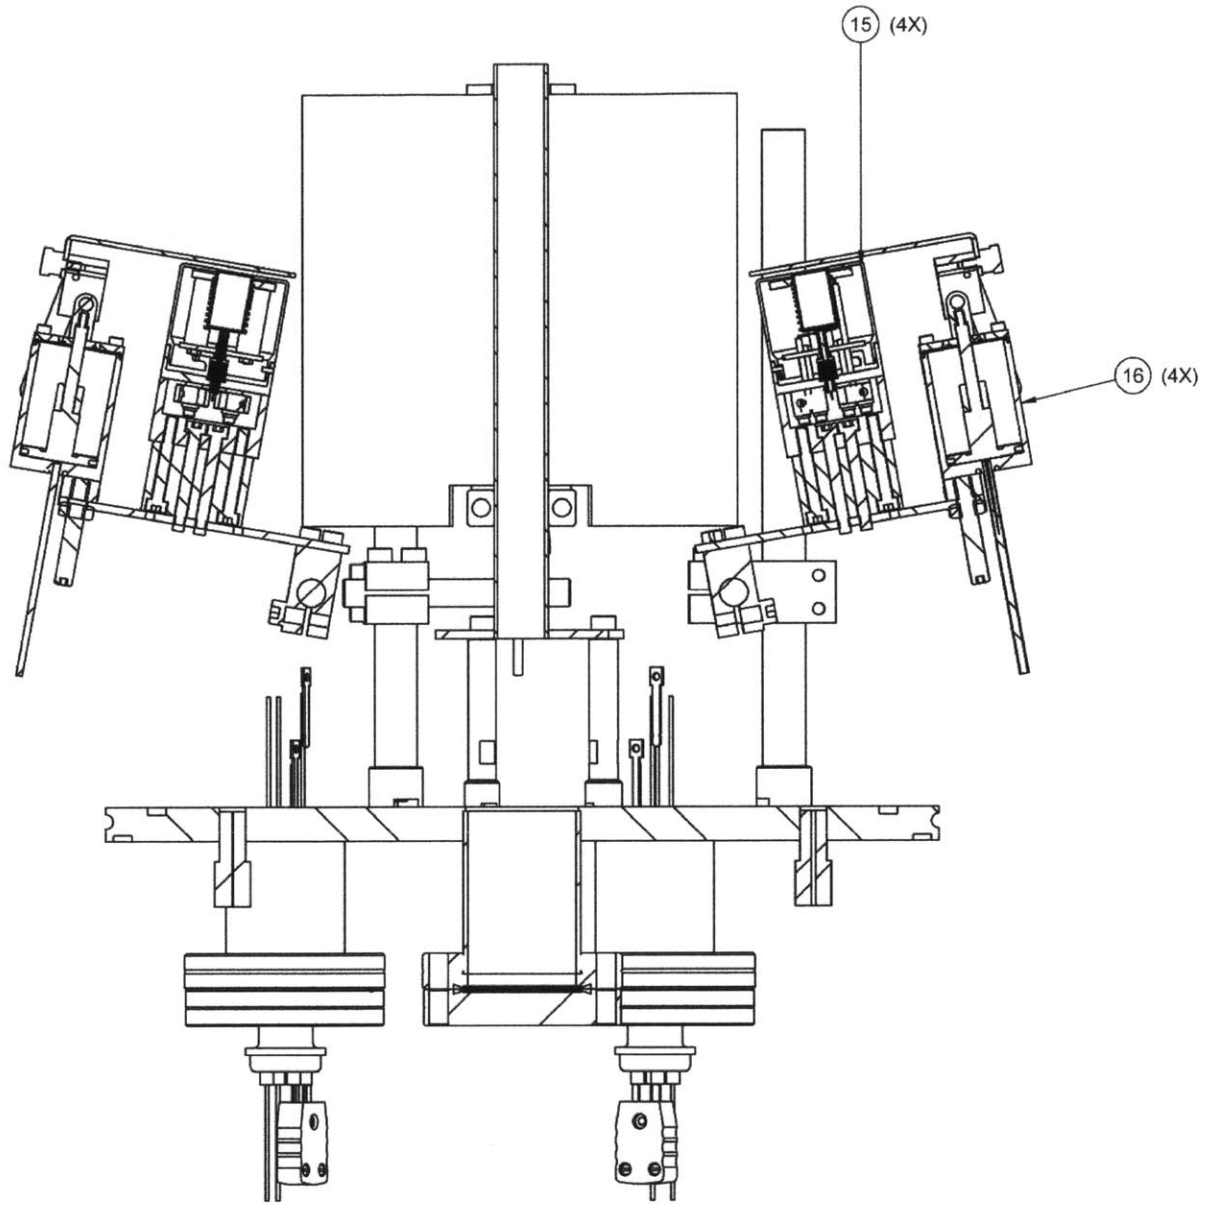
Engineering drawing for oCVD reactor bottom flange with evaporation sources—bottom view.
